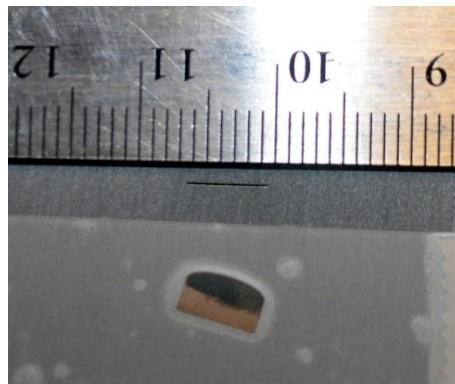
6 mm notch in 3mm thick specimen with the EDM cutting tool
